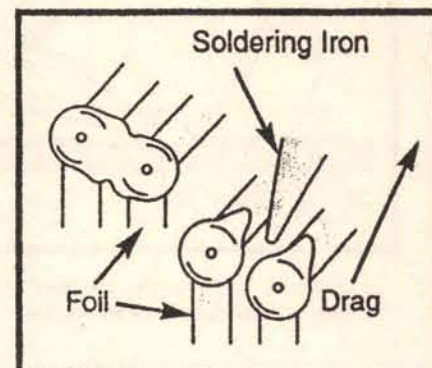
You can sometimes clear a solder bridge by dragging the hot soldering iron tip across the bridge.
